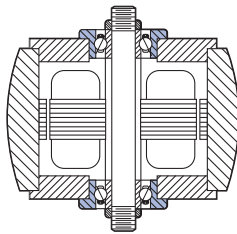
Typical Motor design using rotor as outer ring spacer and stator mount as inner ring spacer – outer ring rotation – Solid preload
